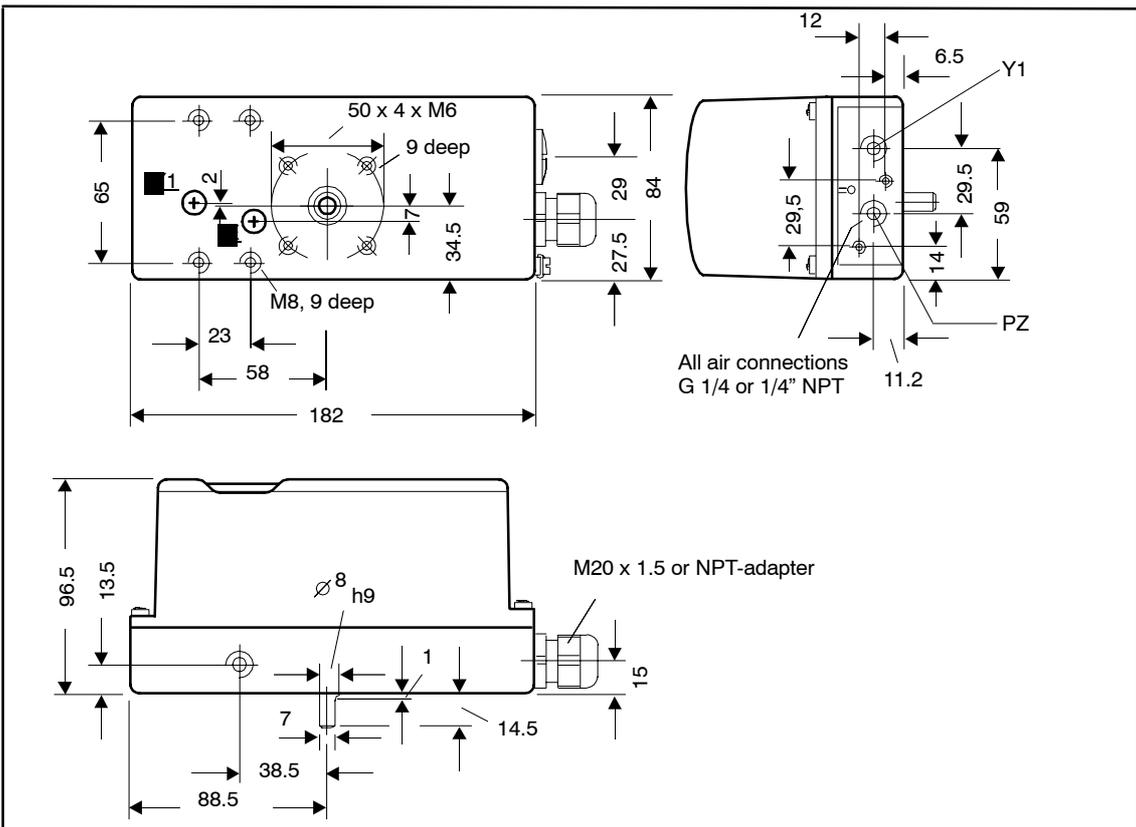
Dimensional drawing version metal housing 6DR5xx1
